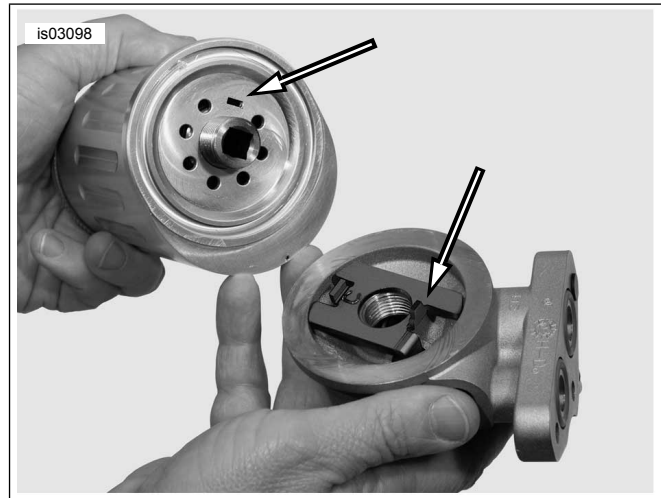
Oil Filter Housing/Anti-Rotation Device Alignment
